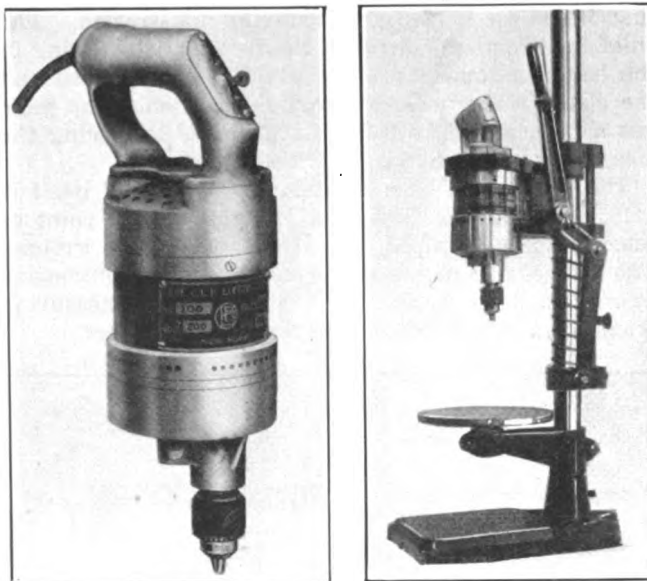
C.L.P. ¼-IN. PORTABLE ELECTRIC DRILL AND STAND
